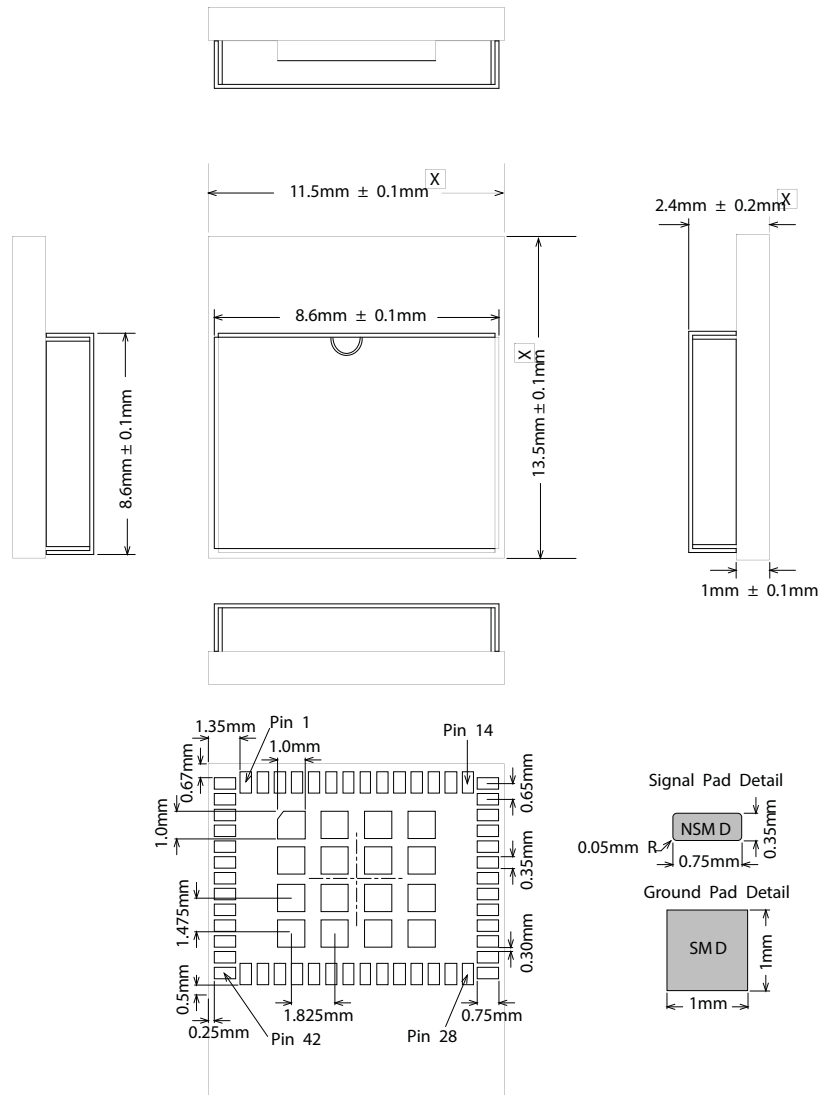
AirPrime BX3105 Mechanical Drawing
